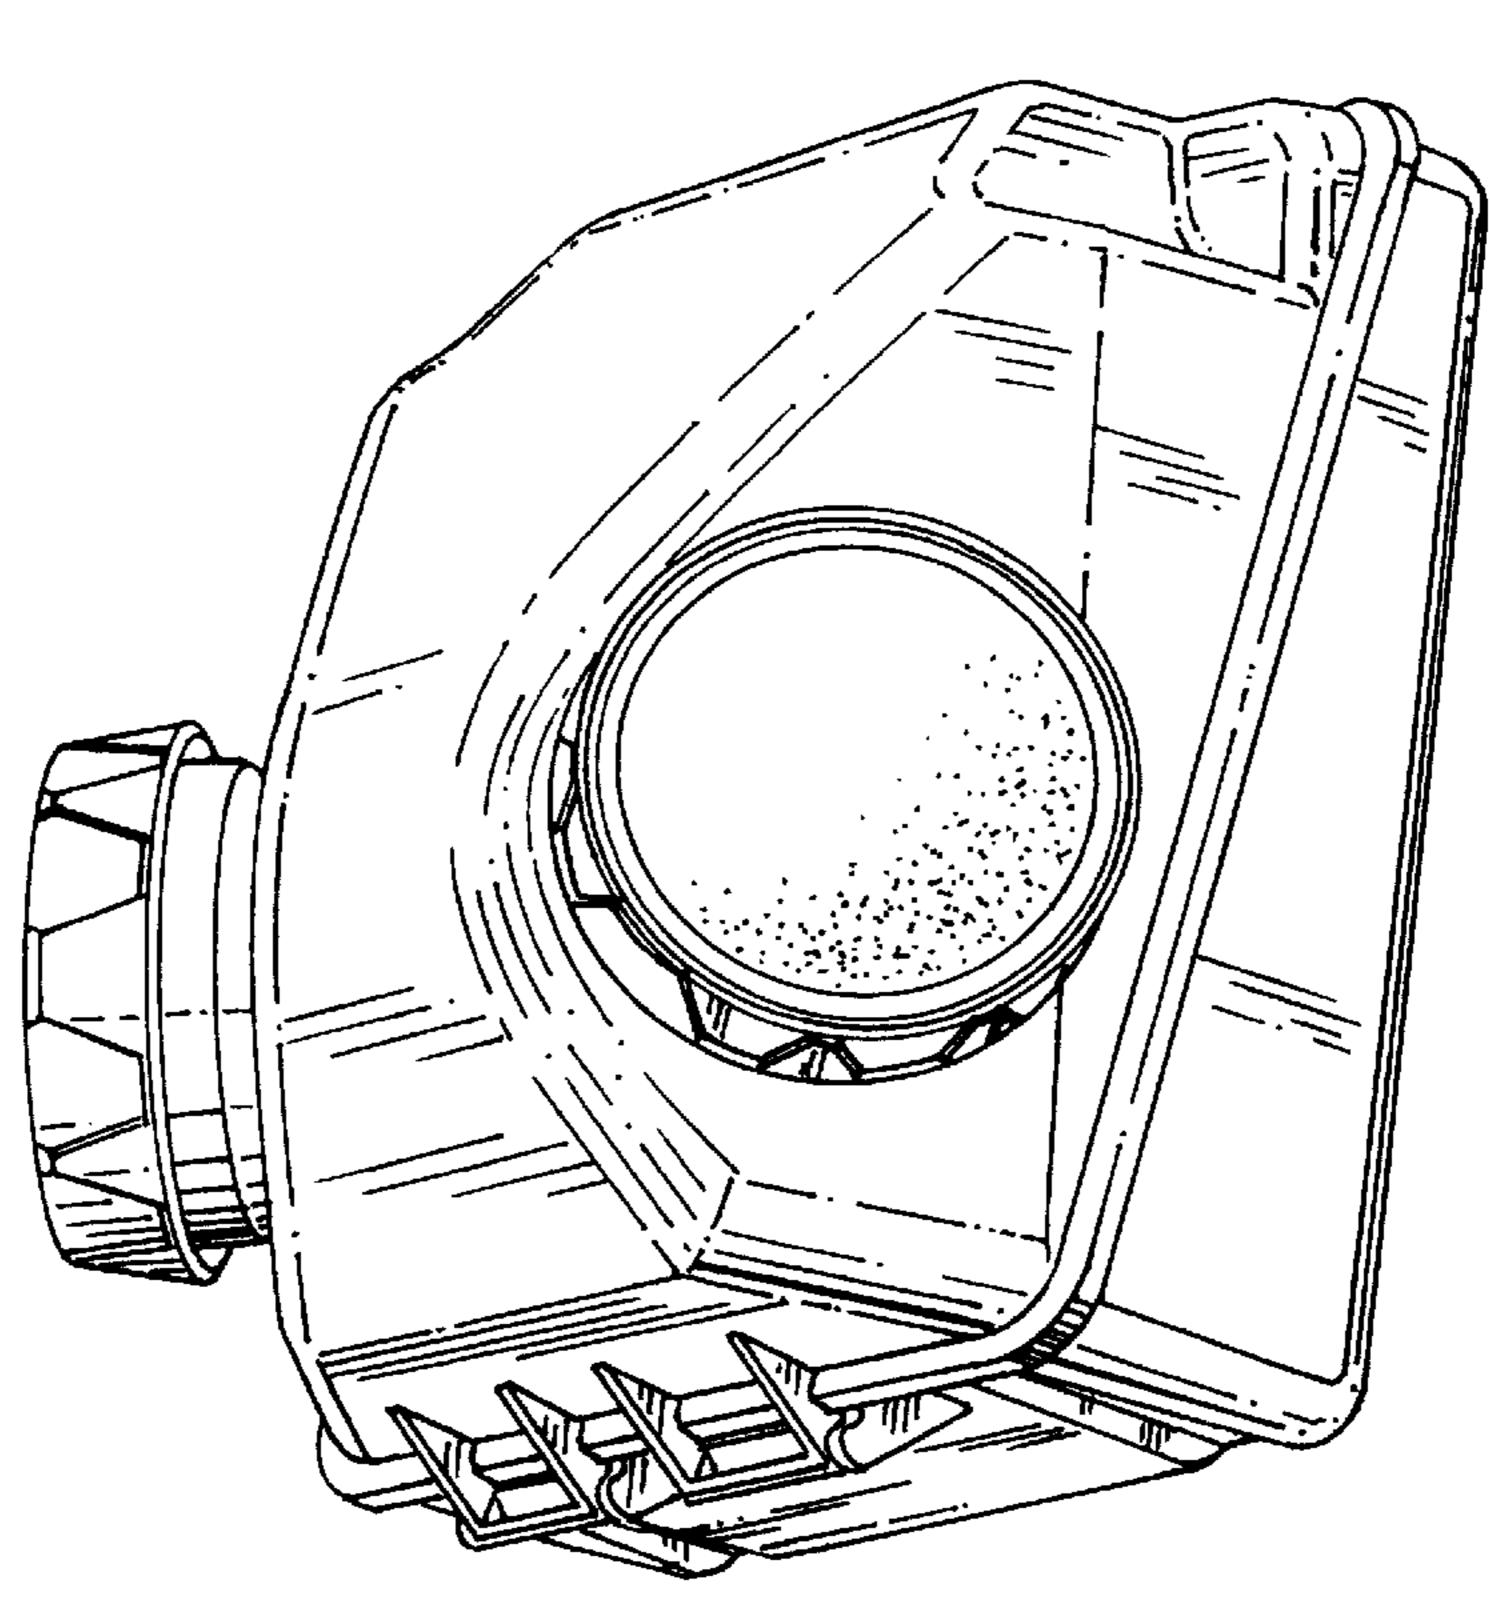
is a bottom perspective view taken from the rear of the fourth embodiment of the industrial emergency unit light fixture;
